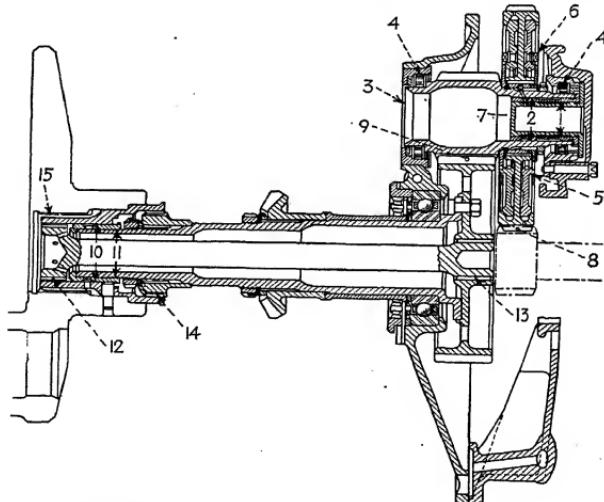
Gearing of supercharger. See list of fits and clearances in Table 2.
